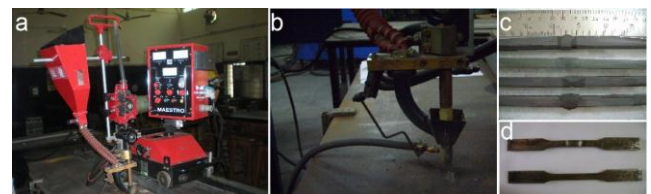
Setup: (a) ‘as-weld’ condition (b) ‘purged’ condition (c) penetration sample specimen and (d) tensile sample specimen
